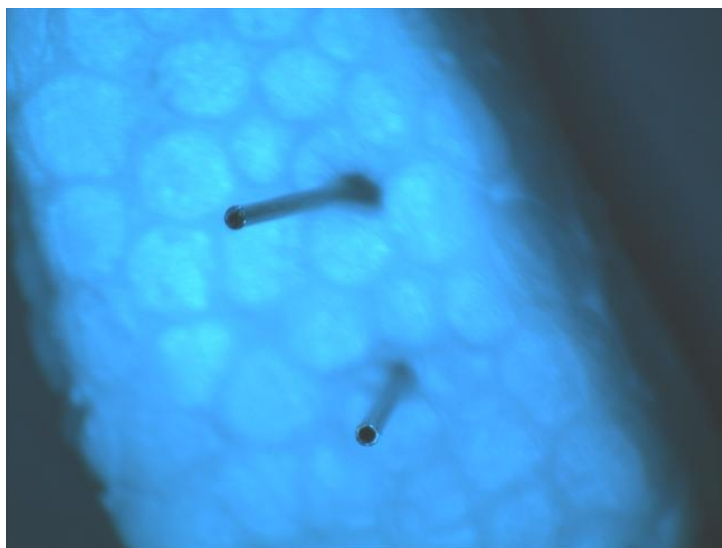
4 Cut edge of the 23 gauge stainless steel tube
